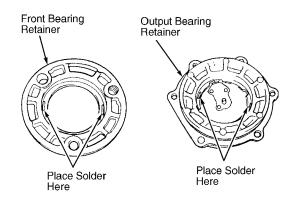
Solder In Front Bearing Retainer & Output Bearing Retainer Courtesy of Mitsubishi Motor Sales of America.
